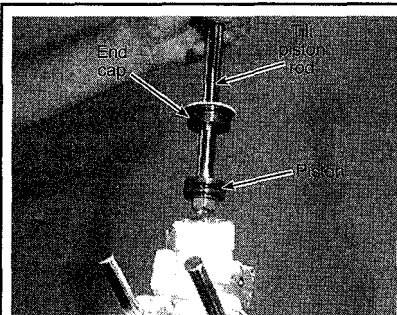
Pull up on the tilt cylinder piston and withdraw it from the cylinder
